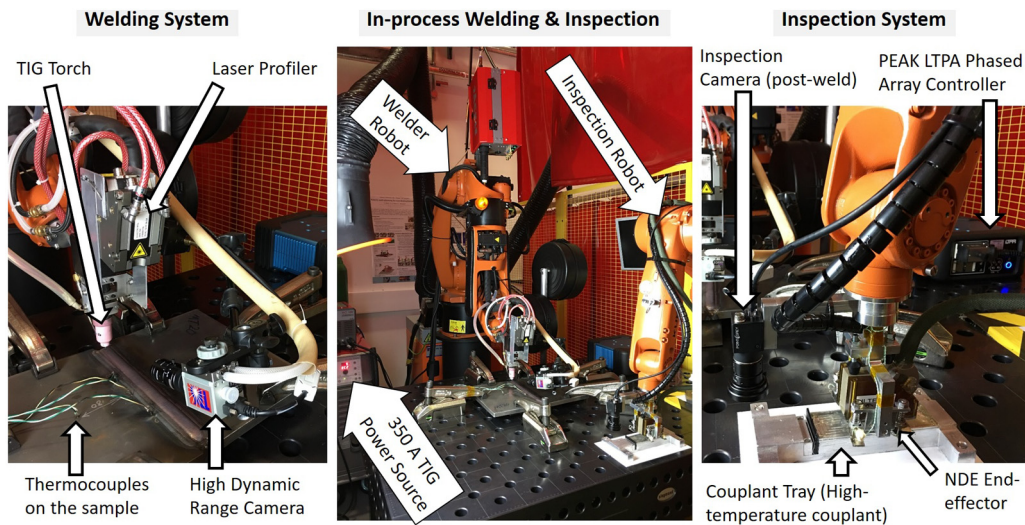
Automated multi-pass welding and inspection system.
